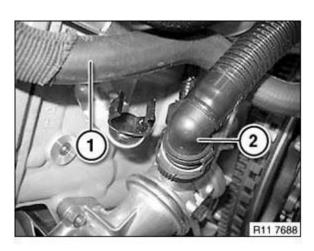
Identifying Heater Hose And Secondary-Air Valves Hose Courtesy of BMW OF NORTH AMERICA, INC.
